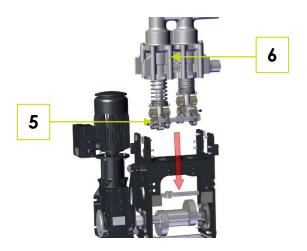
Mounting the shear axles, inserting the pump unit
